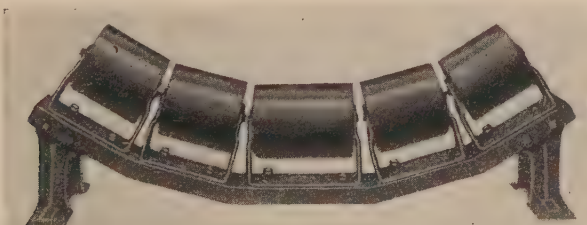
5-pulley Troughing Idler Built of Assembled Units. (Stephens-Adamson Mfg. Co.)
